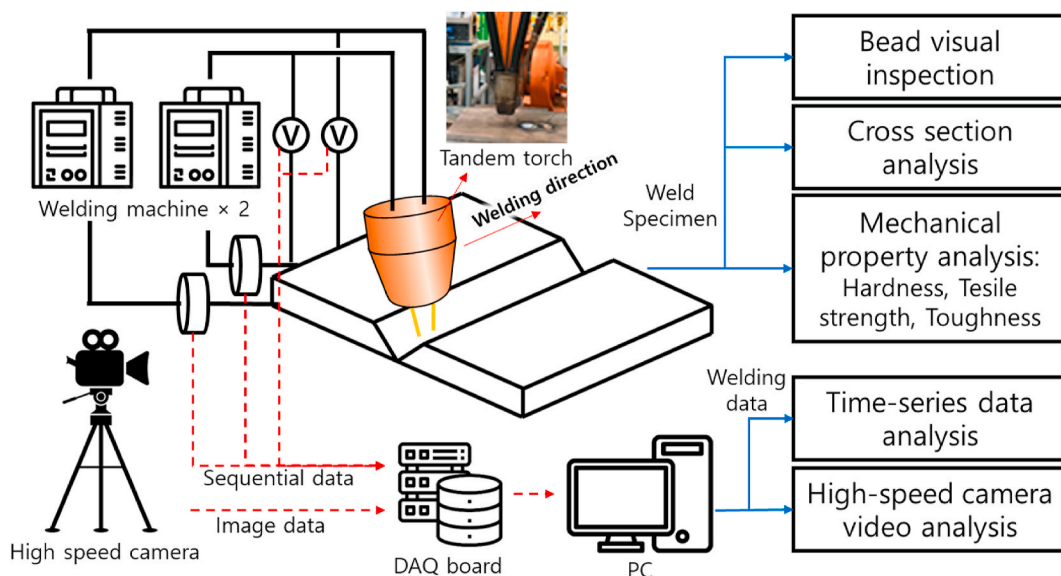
Schematic of data measurement and specimen analysis in a tandem welding system.
